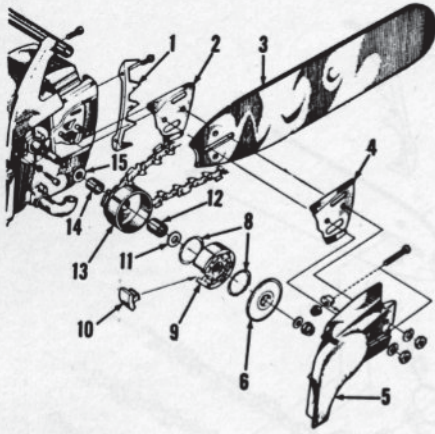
Exploded view of model 995D drive clutch. Spider (9) must be removed from engine crankshaft to service clutch drum (13), bearing and inner race.
